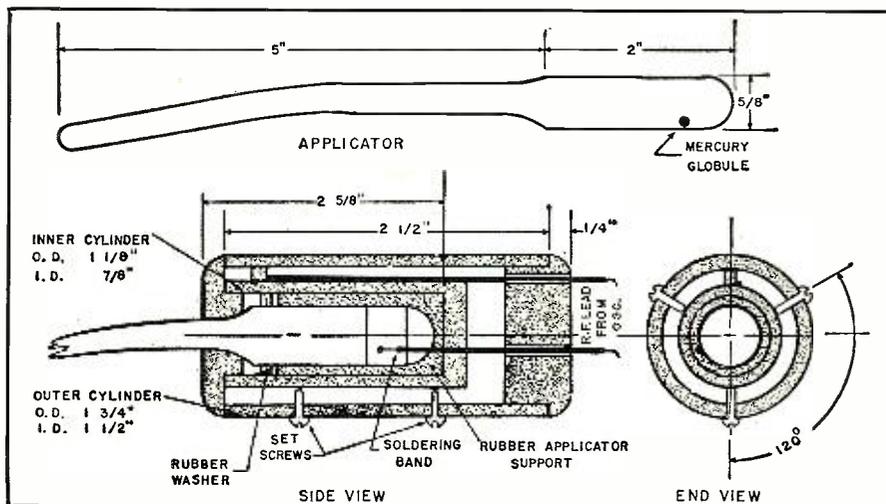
Mechanical details of probe housing. This housing is used as the handle and may take any suitable form the builder finds convenient for his purposes.
